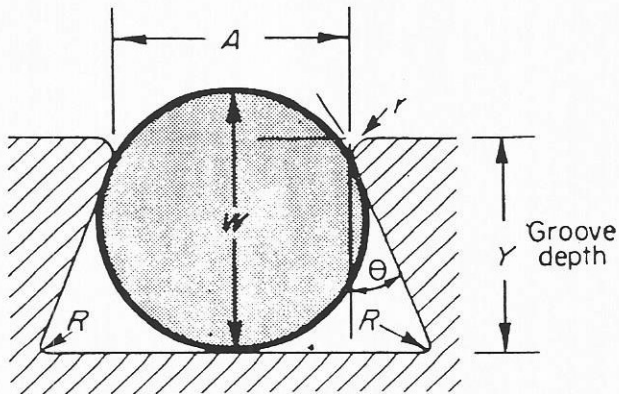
Standard Dovetail Groove Sizes for O-Ring Seals
